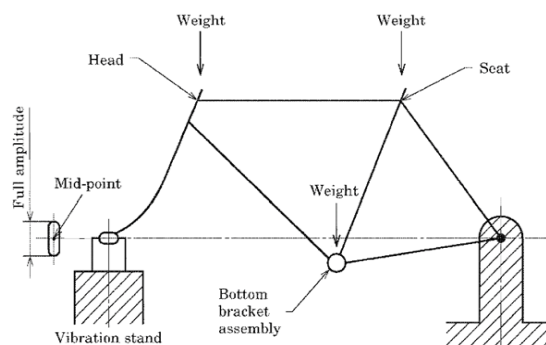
VIBRATION TEST OF FRAME AND FORK ASSEMBLY
